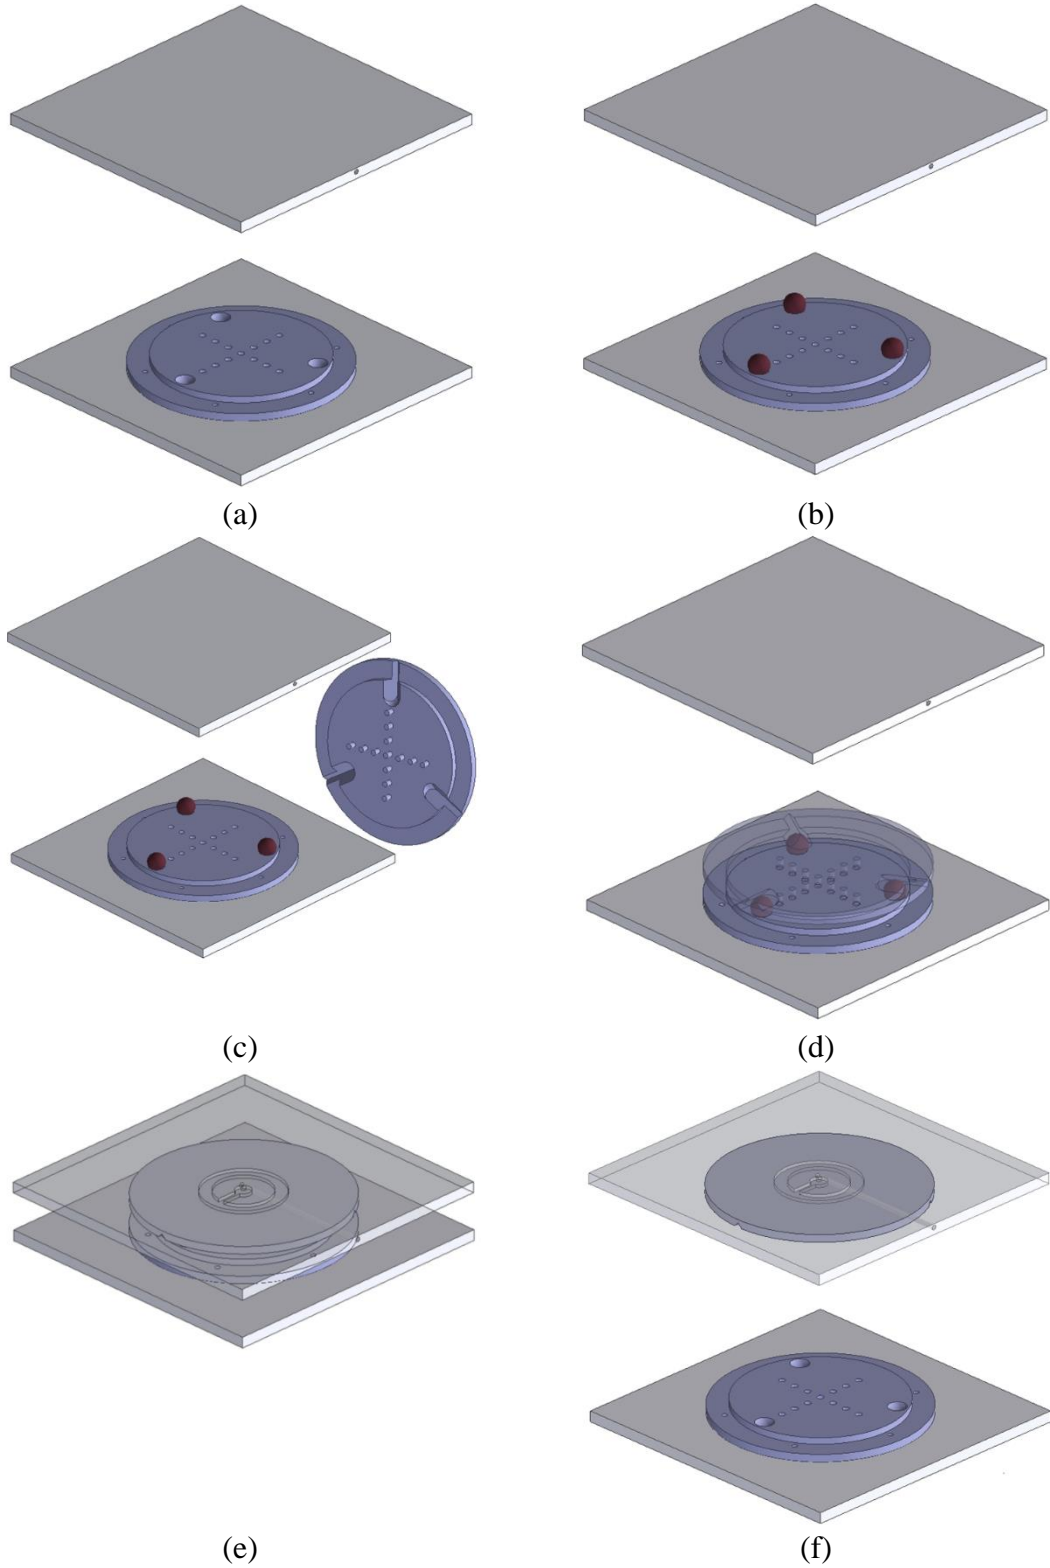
The complementary mold is fastened to aluminum platen (a), three stainless steel sphere are located in the dimples (b), the primary mold is aligned to the complementary mold and coupled by the v-grooves (c-d), the bottom aluminum platen is driven to contact the top aluminum platen (e), the thermal press is opened and the primary mold is held by a vacuum (f).
